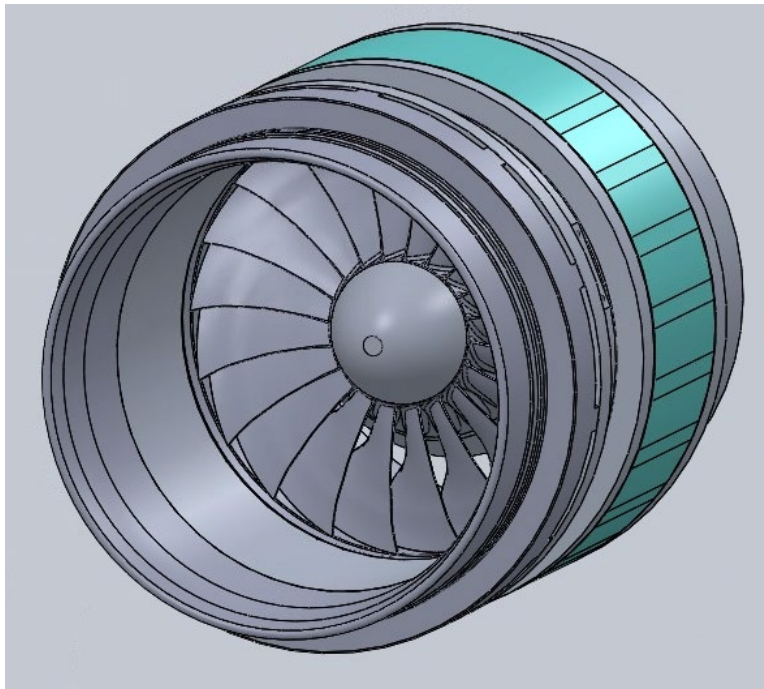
SolidWorks assembly of TCR geometry, isometric view.
